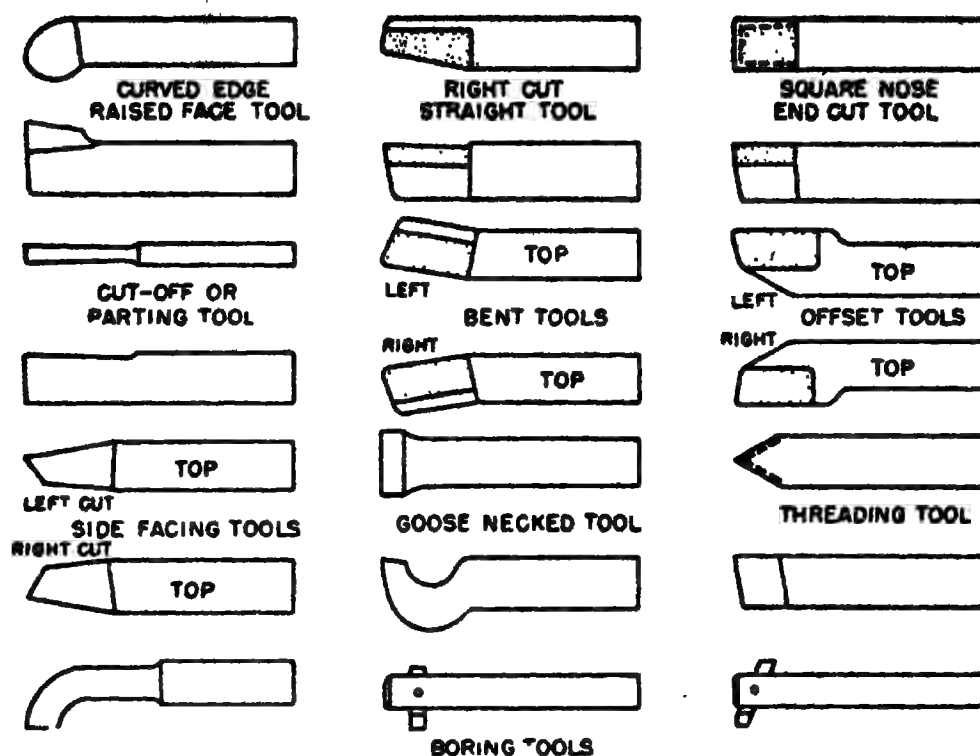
SINGLE POINT CUTTING TOOL SHAPES.
